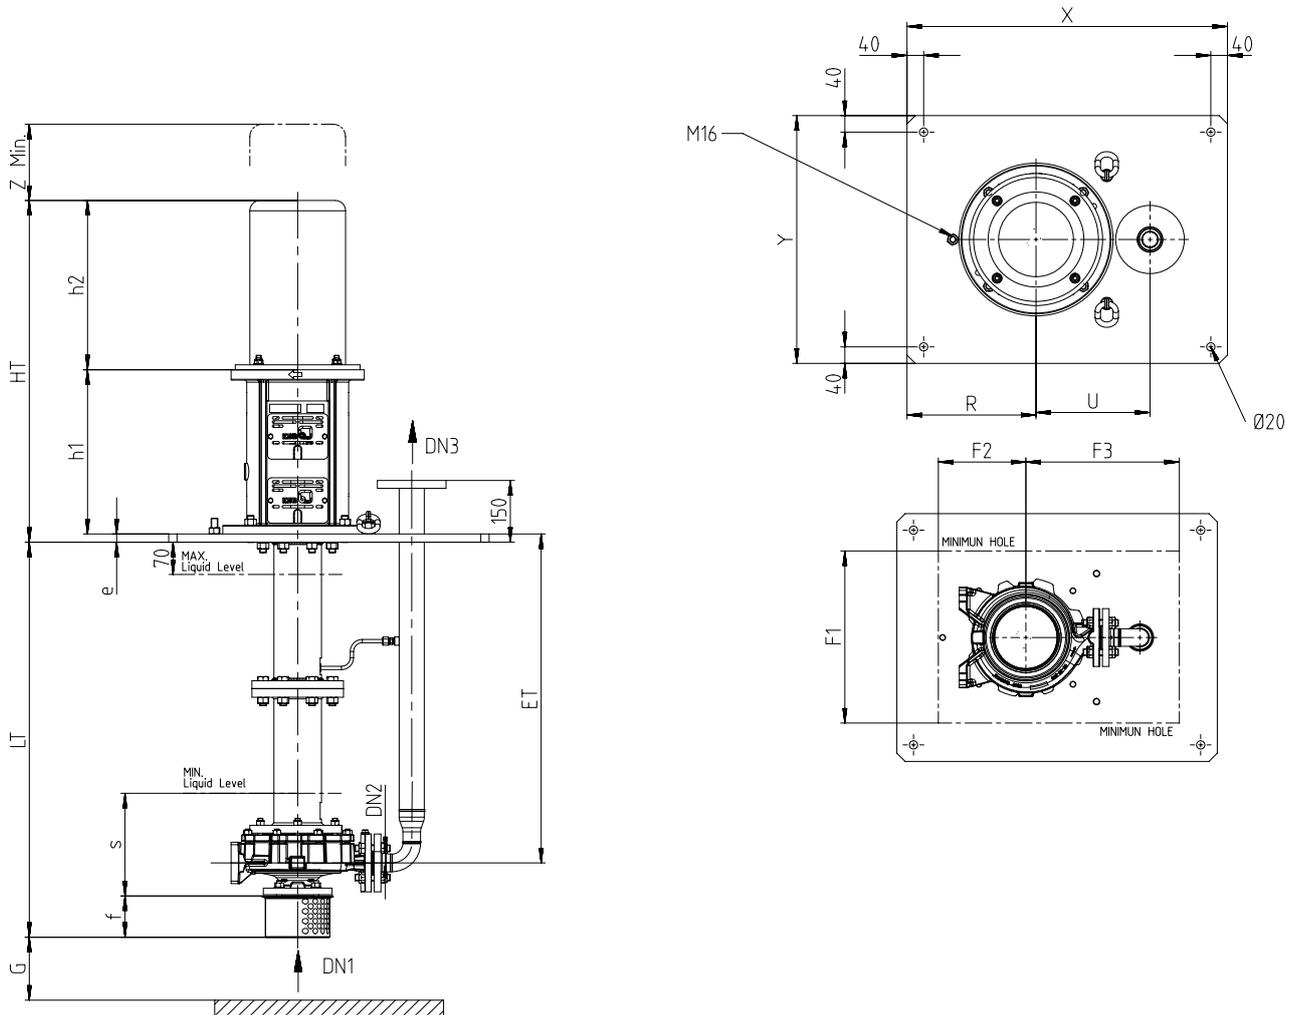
Pump dimensions and immersion depths, rectangular baseplate
